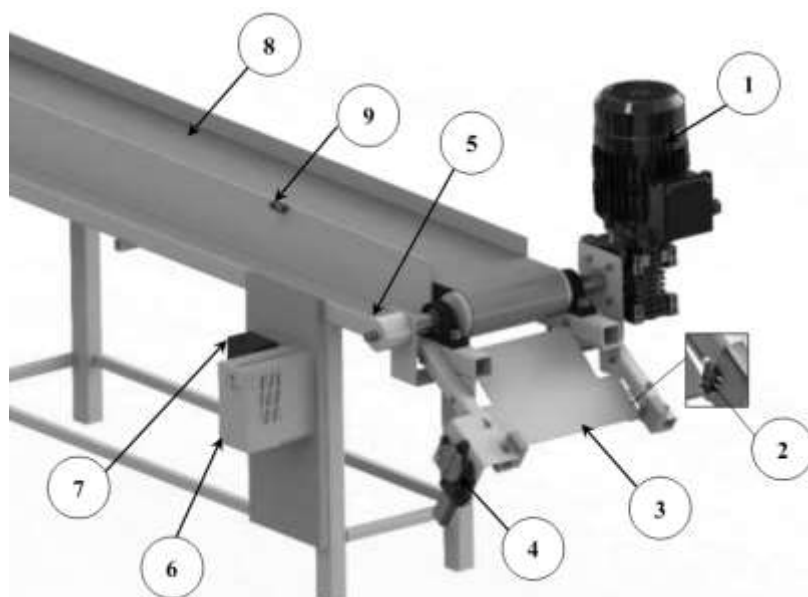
Components of apparatus used for tests (1) Gearbox Motor (2) Limit Switch (3) Valve (4) Valve Effectors (5) Encoder (6) Inverter (7) Control Circuit (8) Conveyor (9) Distance Sensor.
